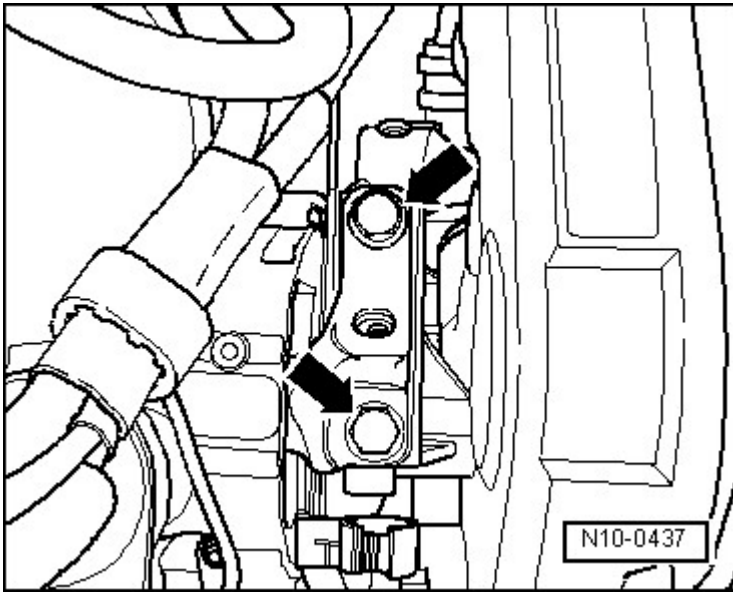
Identifying Mounting Bolts Of Subframe Mount/Engine Bracket
